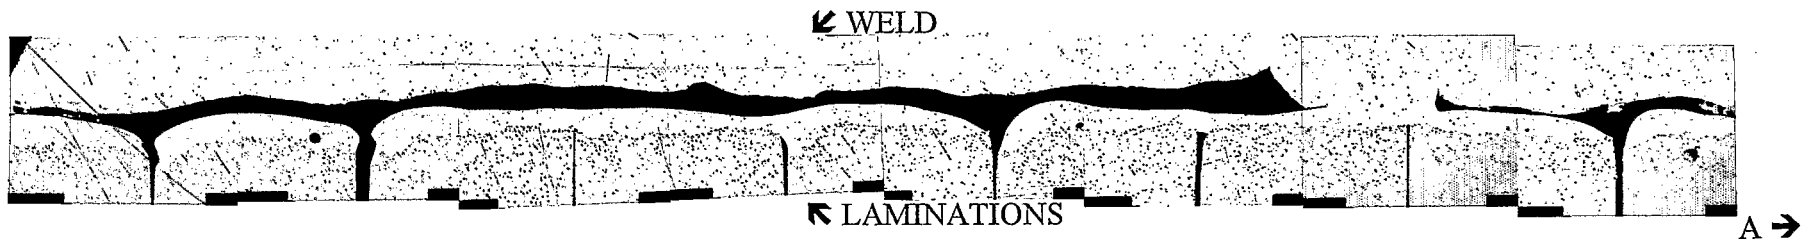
RHIC Dipole Longitudinal Weld Test Specimen "N", prepared using an initial autogenous root pass; 304L Shells welded using GTAW, 100% Argon Shield Gas, 1/16" diameter 308L Filler Wire. Dark area is a void.
